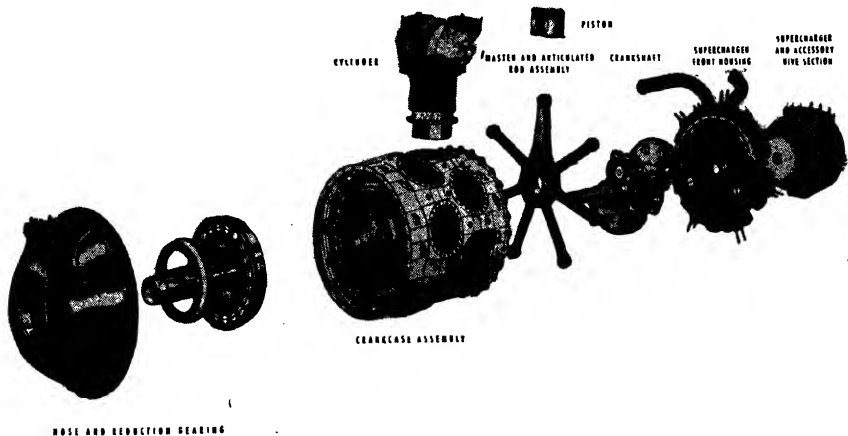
Exploded view, two-row, 14-cylinder, radial engine. (Courtesy Wright Aeronautical Corp.)
